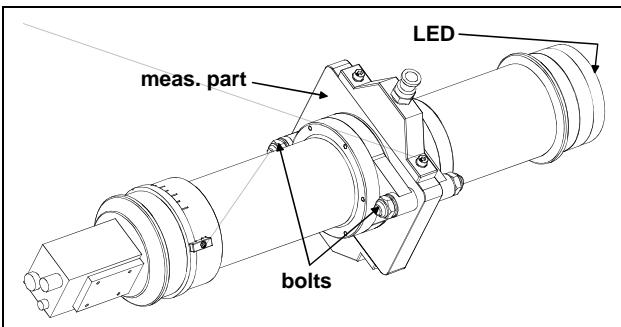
Construction of optical assembly. The measuring part will come loose when the bolts are removed.
